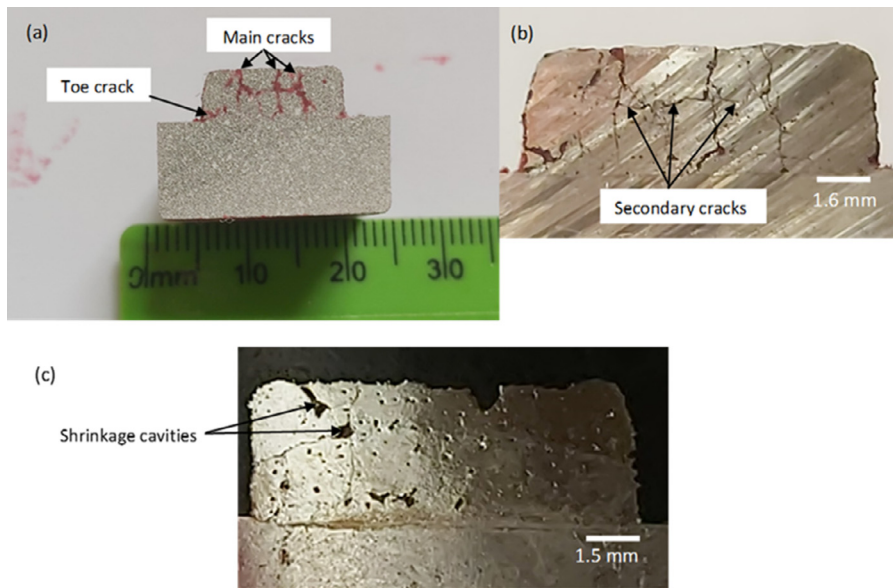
Cracks on samples deposited at 200 W, 3.2 mm/s, 12.2 g/min; (a) Dye penetrant tested sample, (b) As-sectioned cross section, (c) As-polished cross section.
